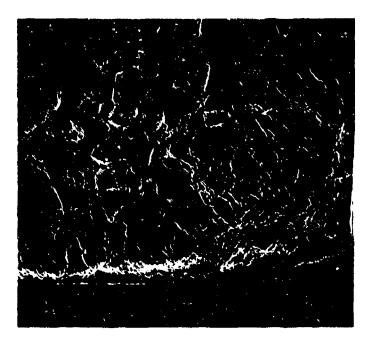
Origin of fatigue failure in a hydrogen-embrittled A-514 weldment containing porosity, 120x.
